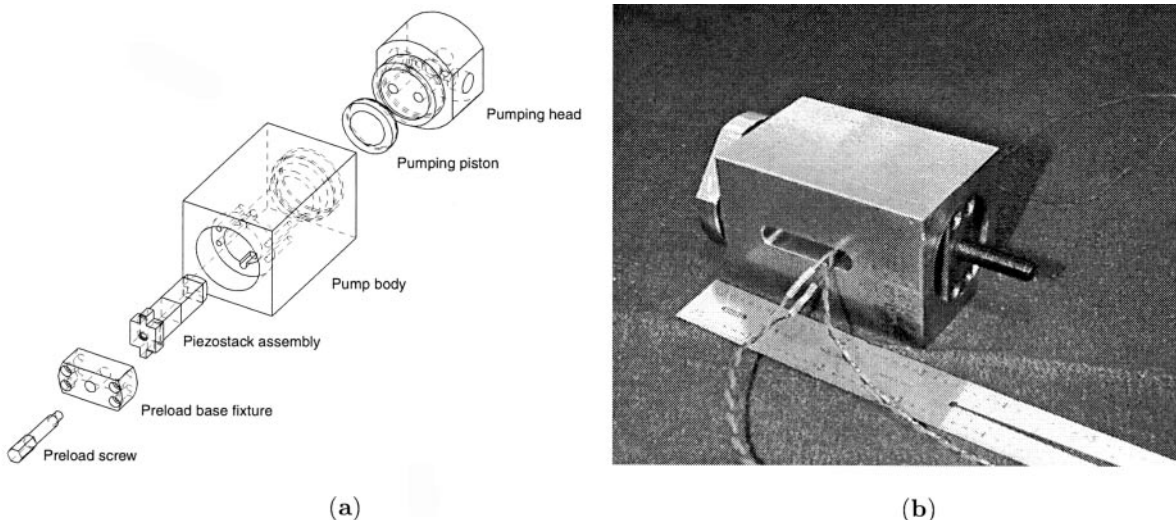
First prototype piezoelectric-hydraulic pump: (a) Exploded view; (b) First assembled prototype
